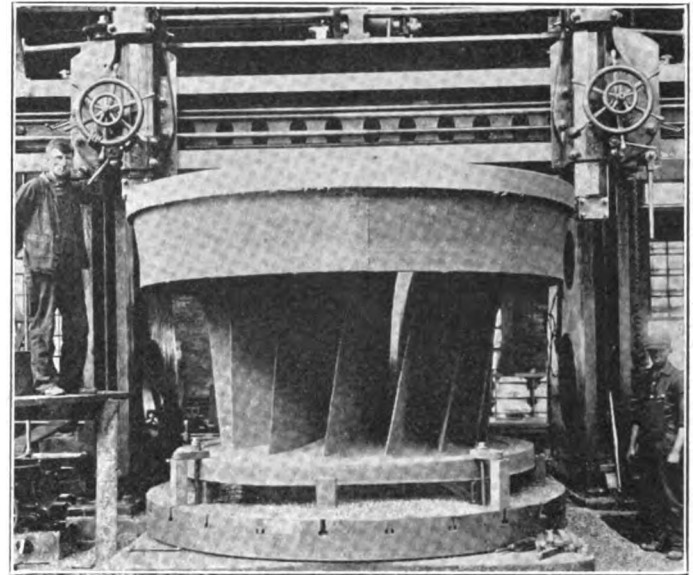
80-IN. TYPE NO. 13 HYDRAULIC TURBINE RUNNER
